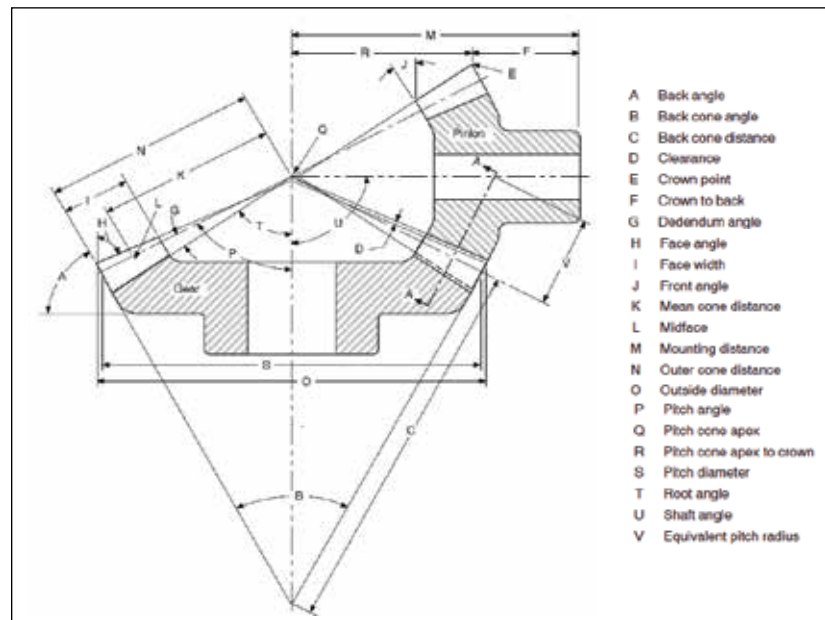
A set of the geometrical dimensions for bevel and hypoid gearings recommended by ANSI/AGMA 2005-D03 standard [1].
